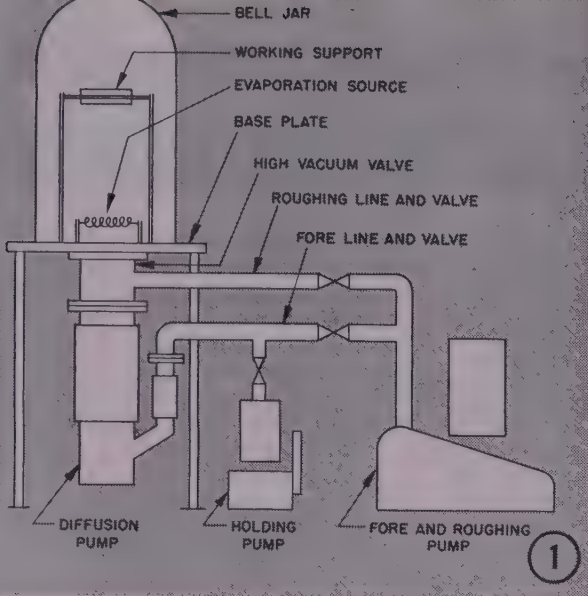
Typical setup for applying evaporated metallic coatings. Large commercial units employ the same basic technique. Courtesy National Research Corp.
